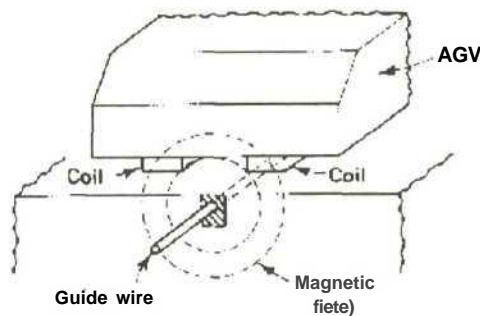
Wire guided system using the magnetic field produced by the guide wire to steer the vehicle along a path. [Groover]
